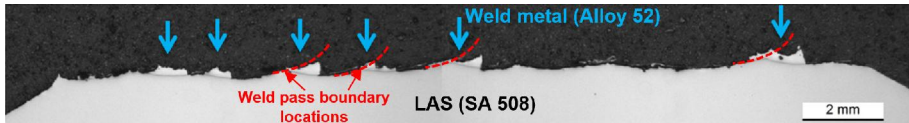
An optical microscope image showing the fracture surface cross-section, depicted in Figure 76 b, SA 508 half of the specimen. Cracking in Alloy 52 follows often the weld pass boundaries.
